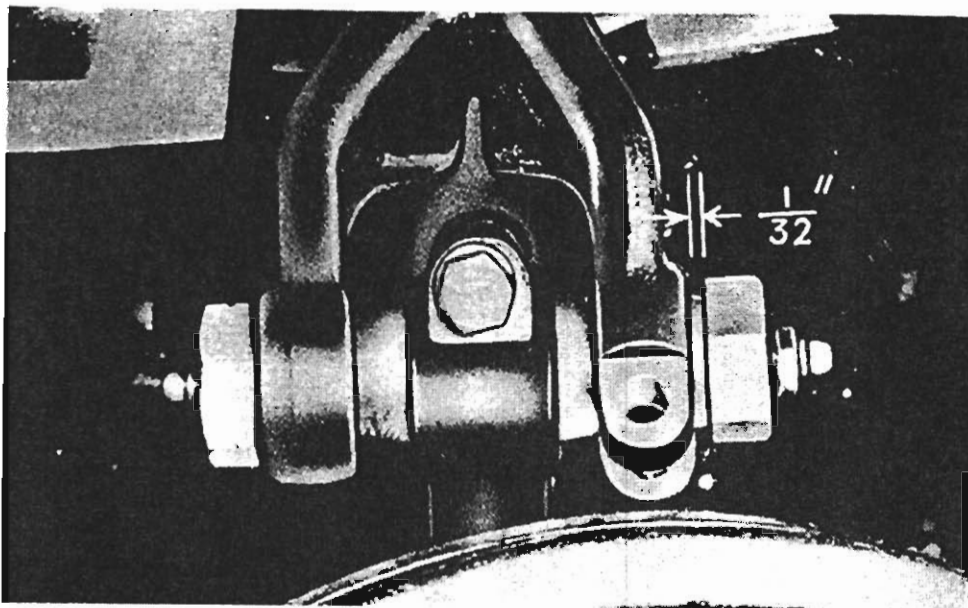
The Front Bushing Should Be Turned In Until $\frac{1}{32}$ Inch Clearance Exists as Shown.
